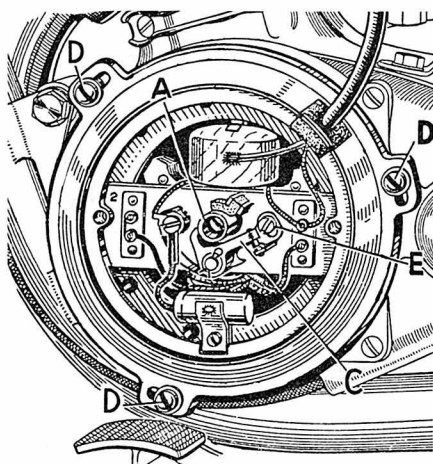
Ignition timing is adjusted by moving the stator plate after loosening three screws (D).
